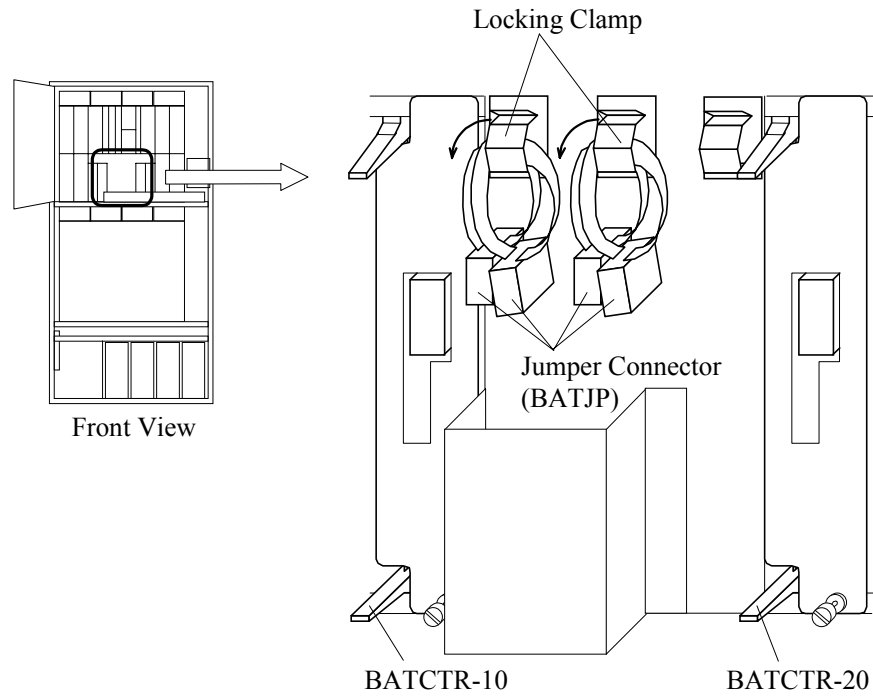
Removal of Jumper Connectors
